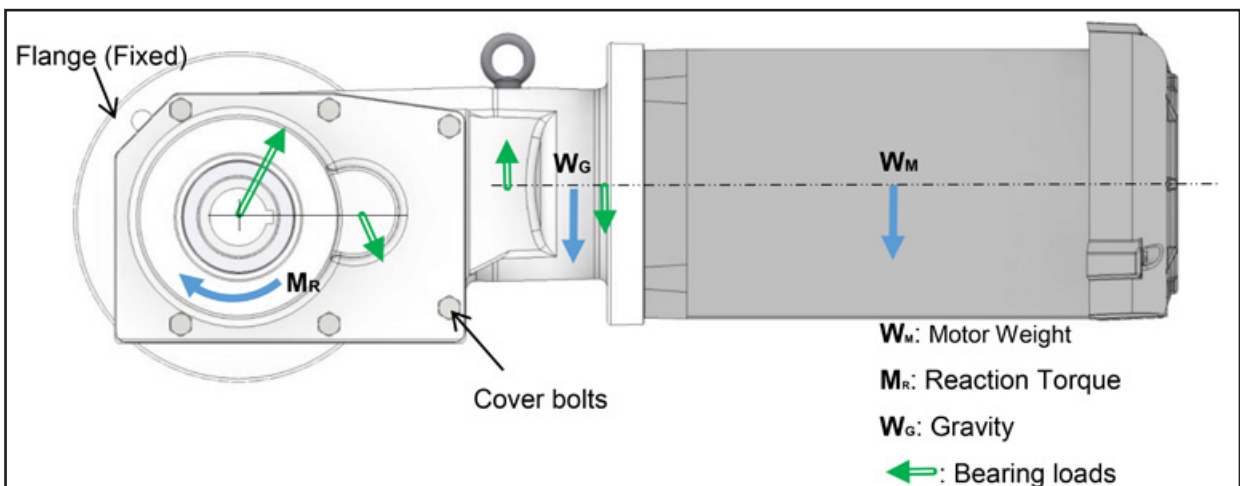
Loads acting on flange-mounted horizontal gearbox.
